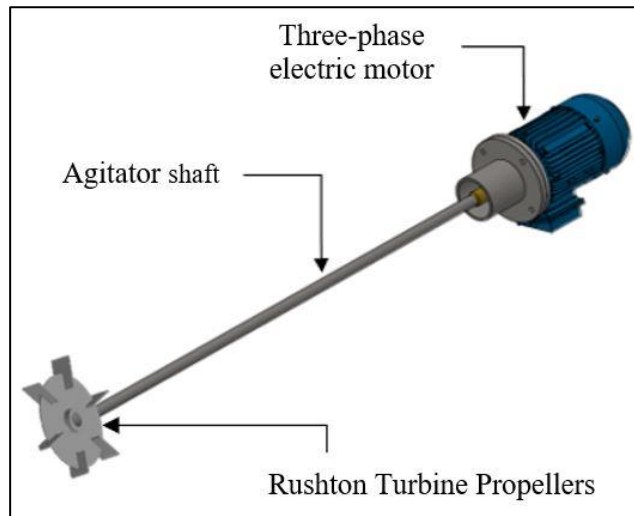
Design and Shaft, turbine whit coupling to the electric motor
